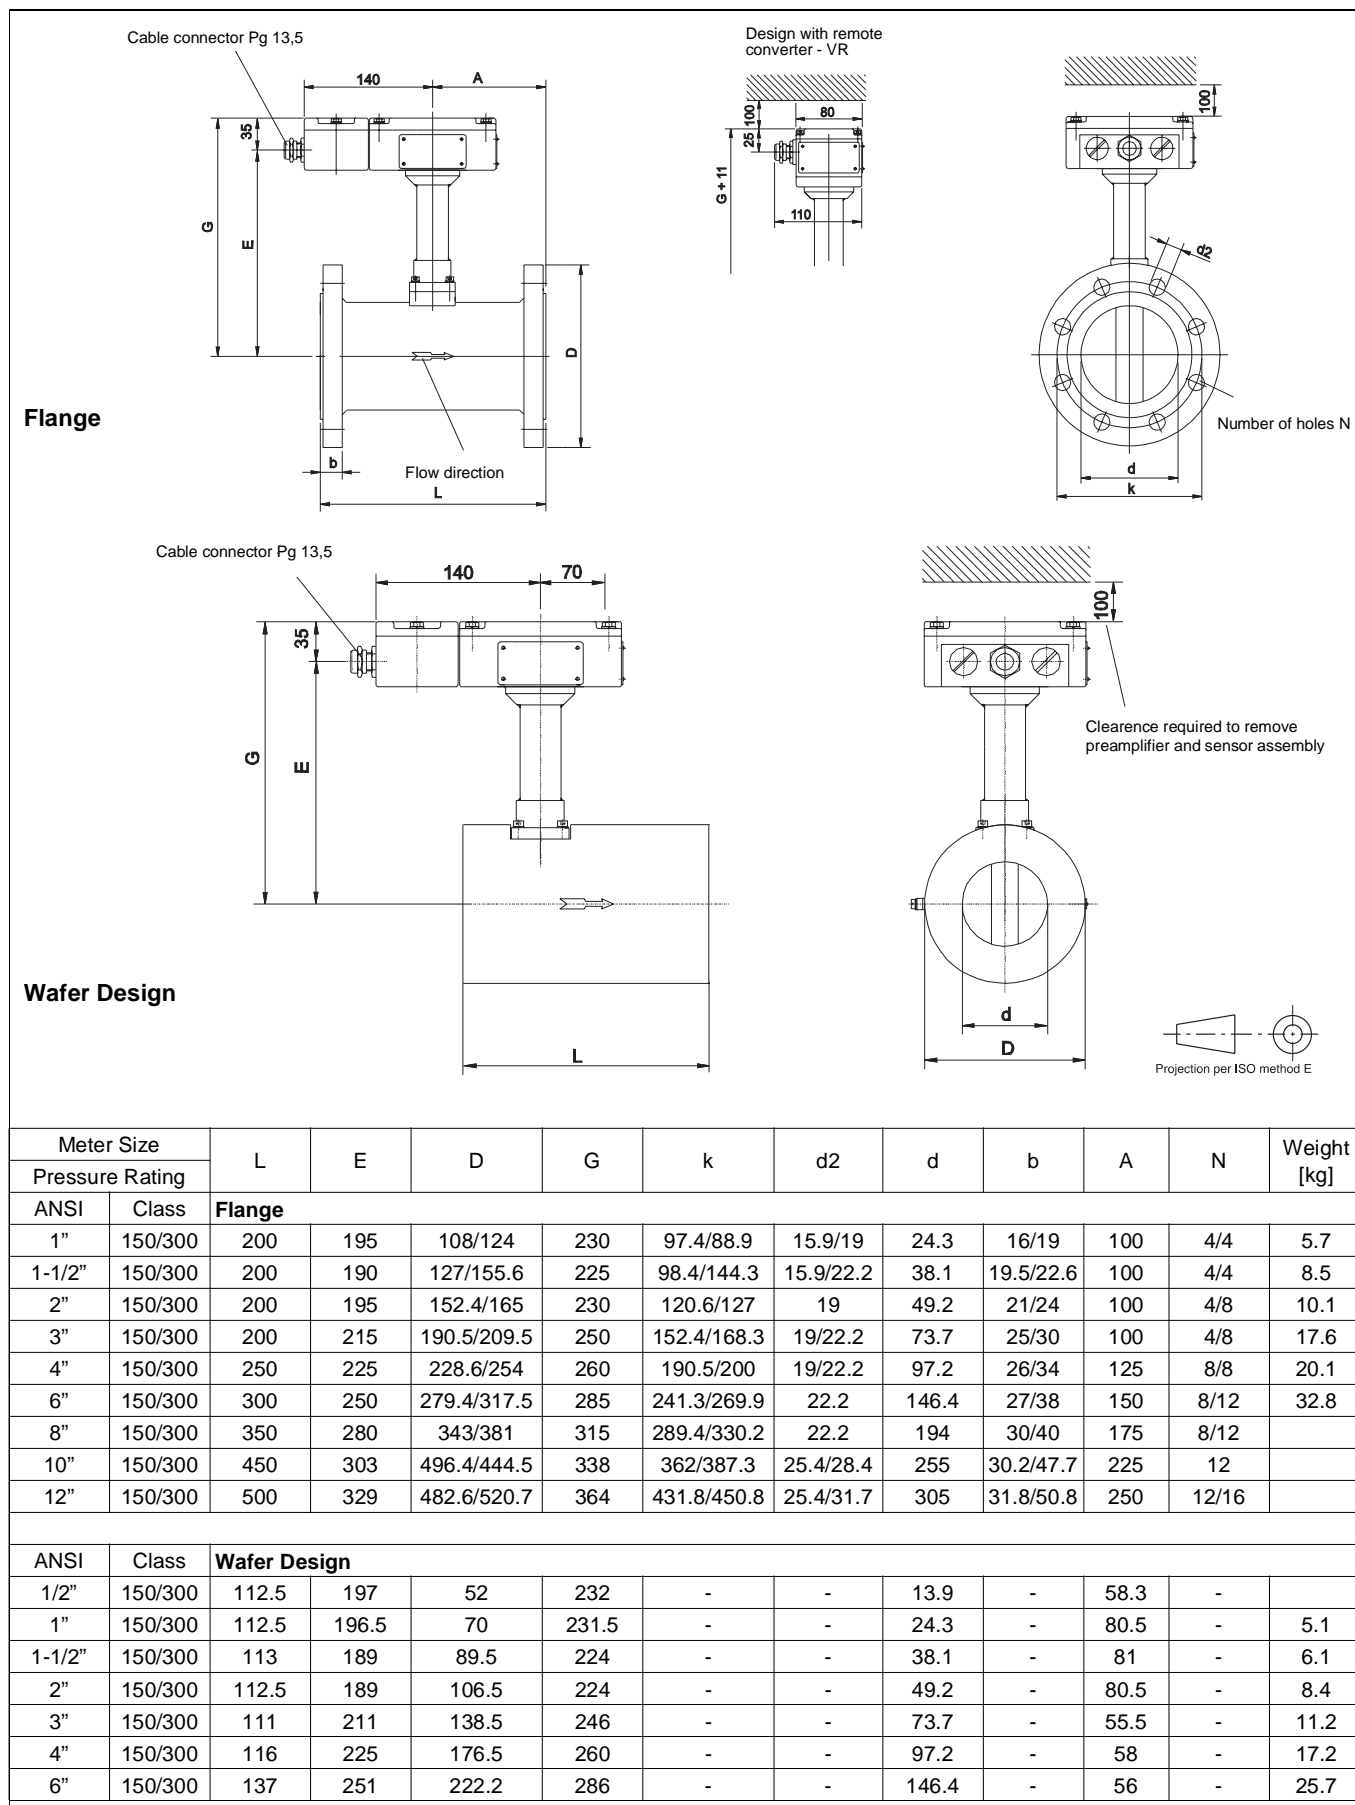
Dimensions 10VT1000/10VR1000, ANSI
